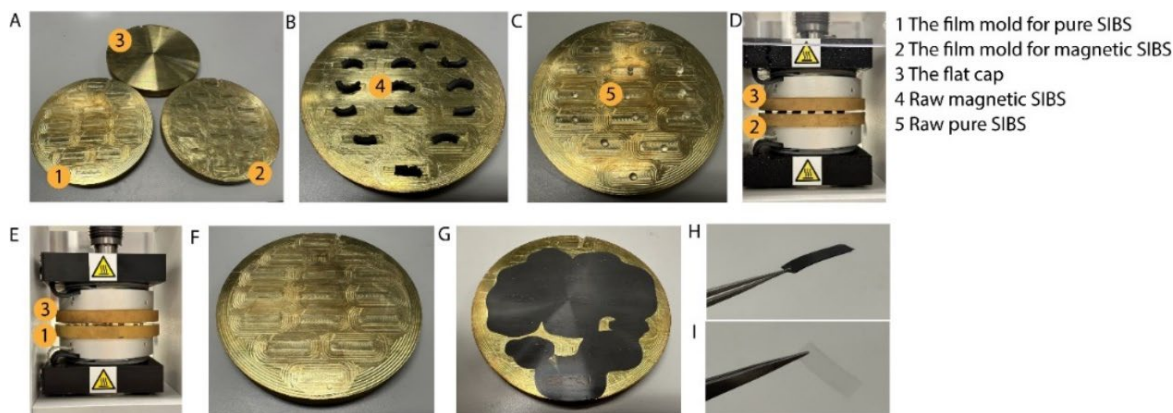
The precursor film fabrication process. (A) The brass molds for making thin films. (B) The raw magnetic SIBS placed in the grooves. (C) The raw pure SIBS placed in the grooves. (D) The molding process of magnetic SIBS using the hot embossing. (E) The molding process of pure SIBS. (F) The molded pure SIBS. (G) The molded magnetic SIBS. (H) Magnetic SIBS film cut and demolded. (I) Pure SIBS film cut and demolded.
